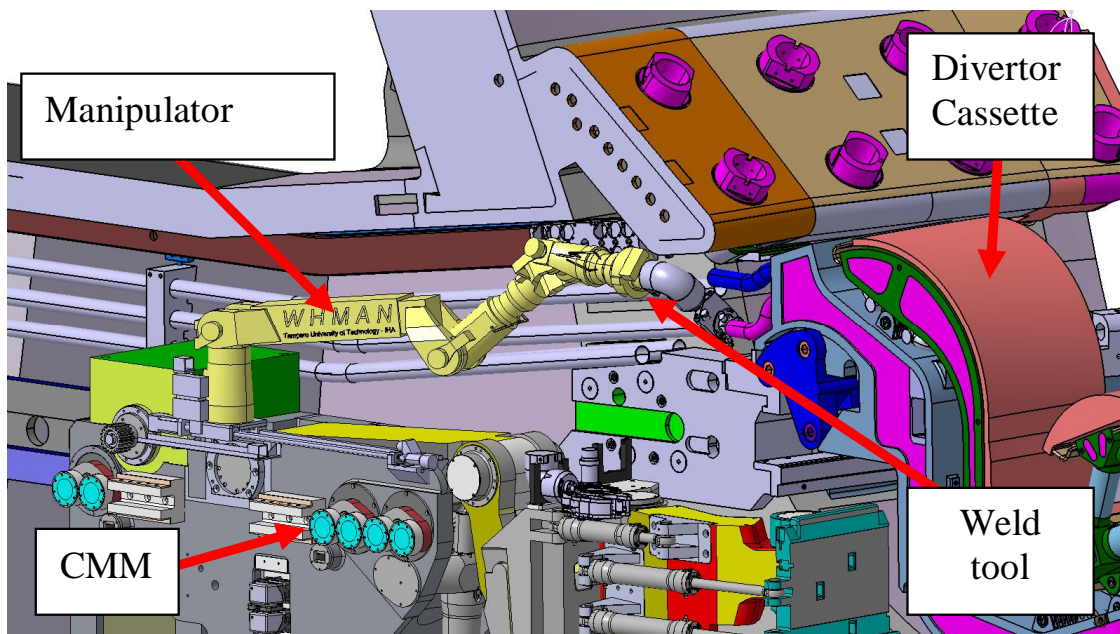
CMM mounted manipulator deploying welding tool to Divertor Cassette cooling pipe
